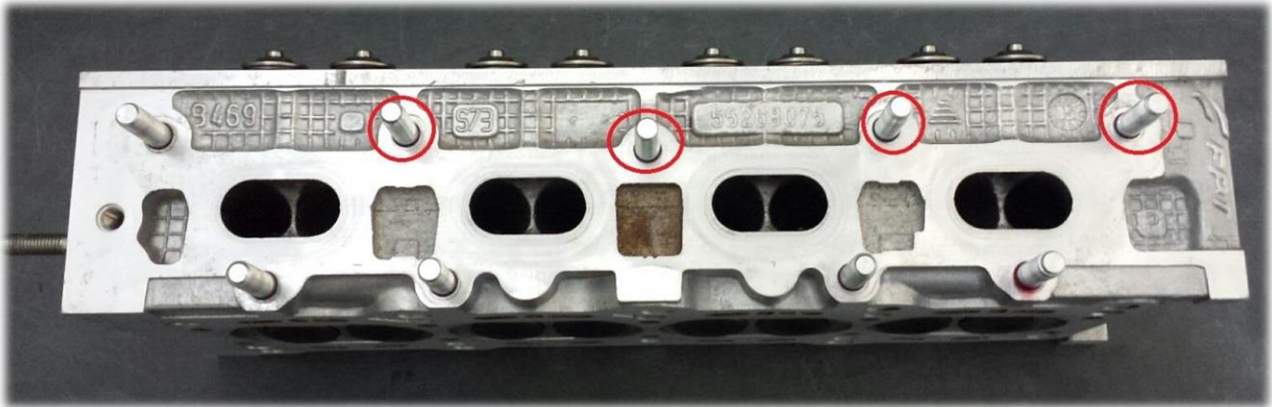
engine head, exhaust side: through hole are enlightened in red.
